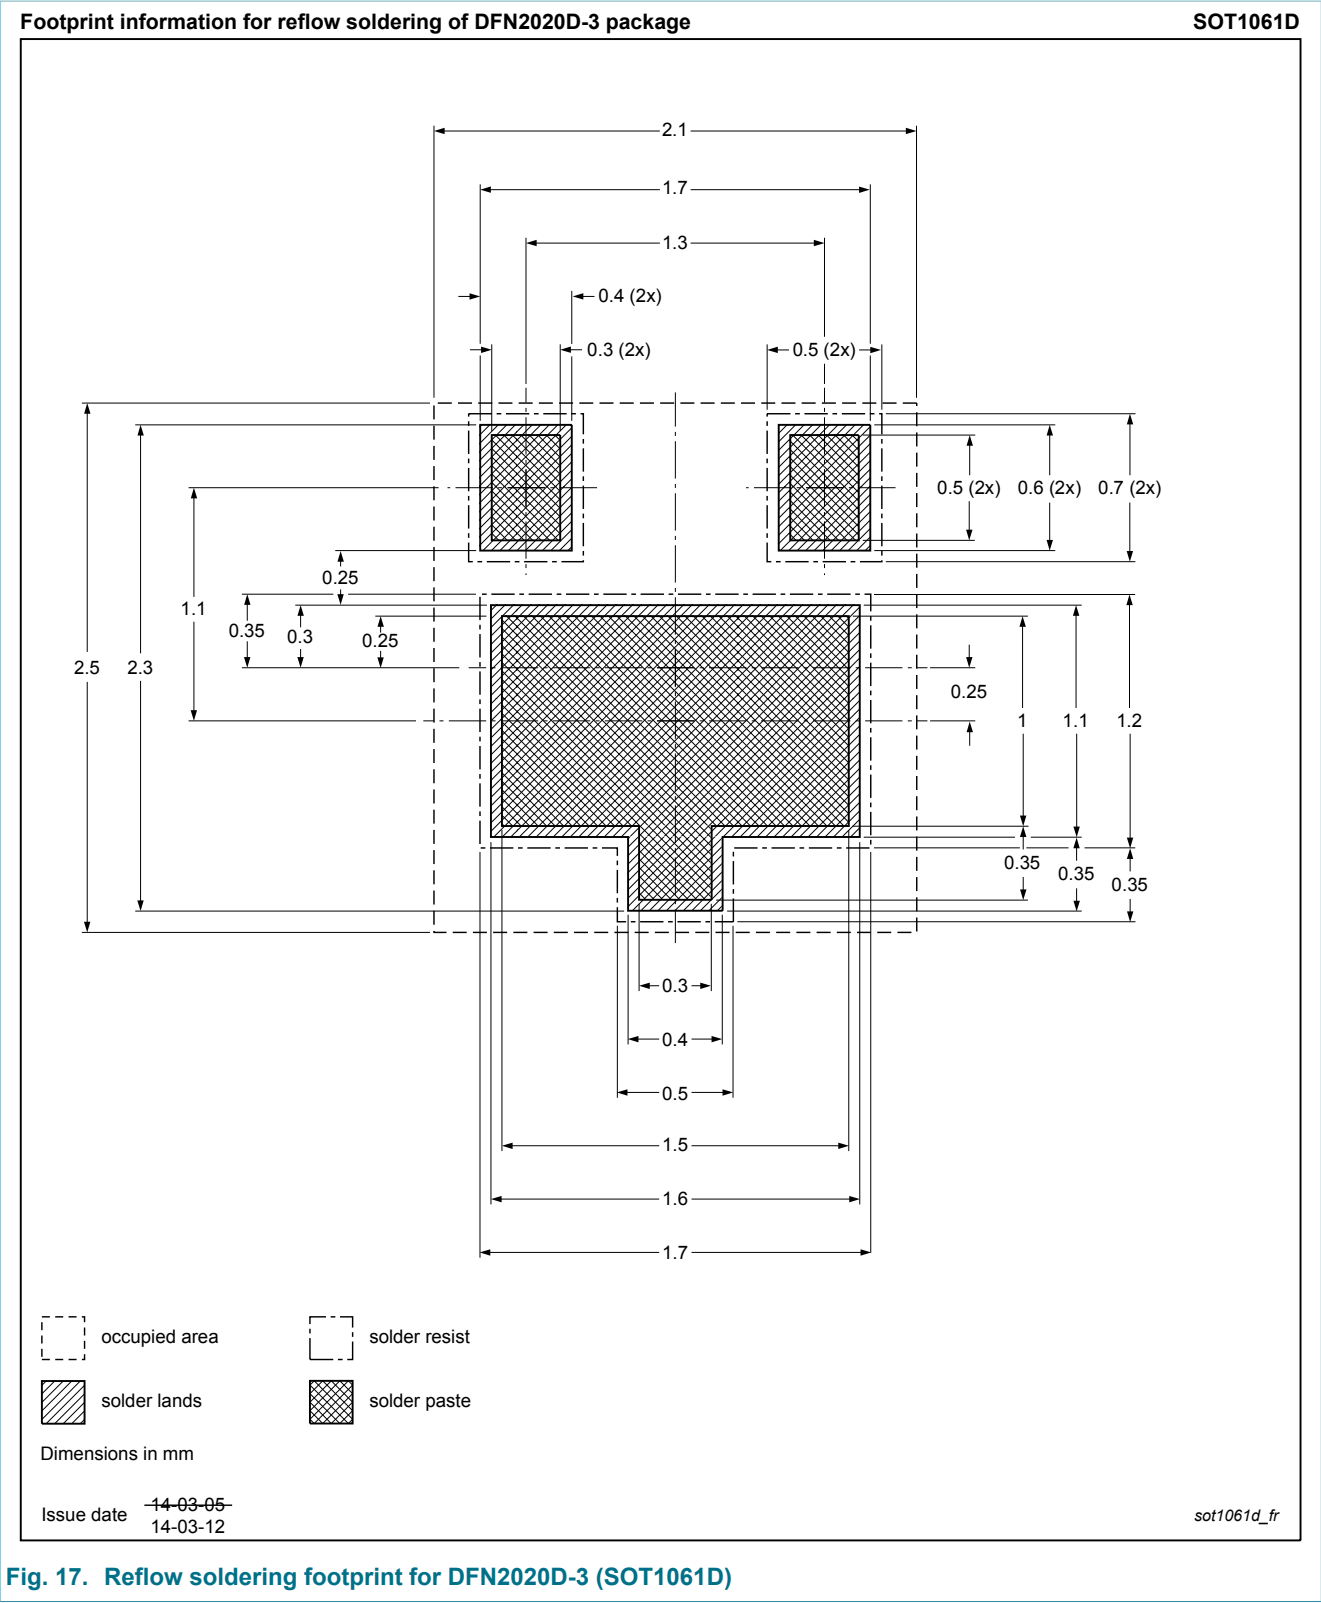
Reflow soldering footprint for DFN2020D-3 (SOT1061D)
